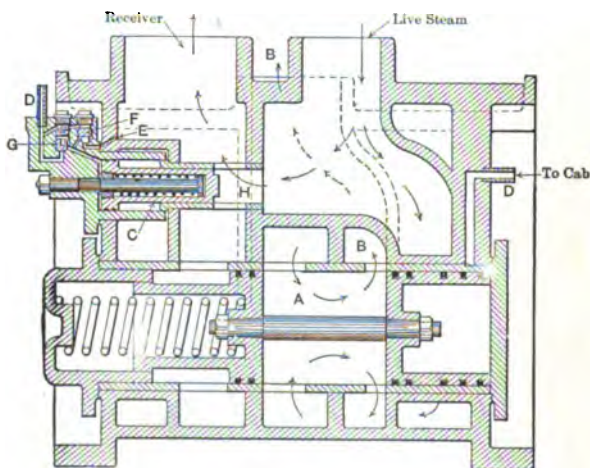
POSITION OF VALVE RUNNING AS A SIMPLE ENGINE.
